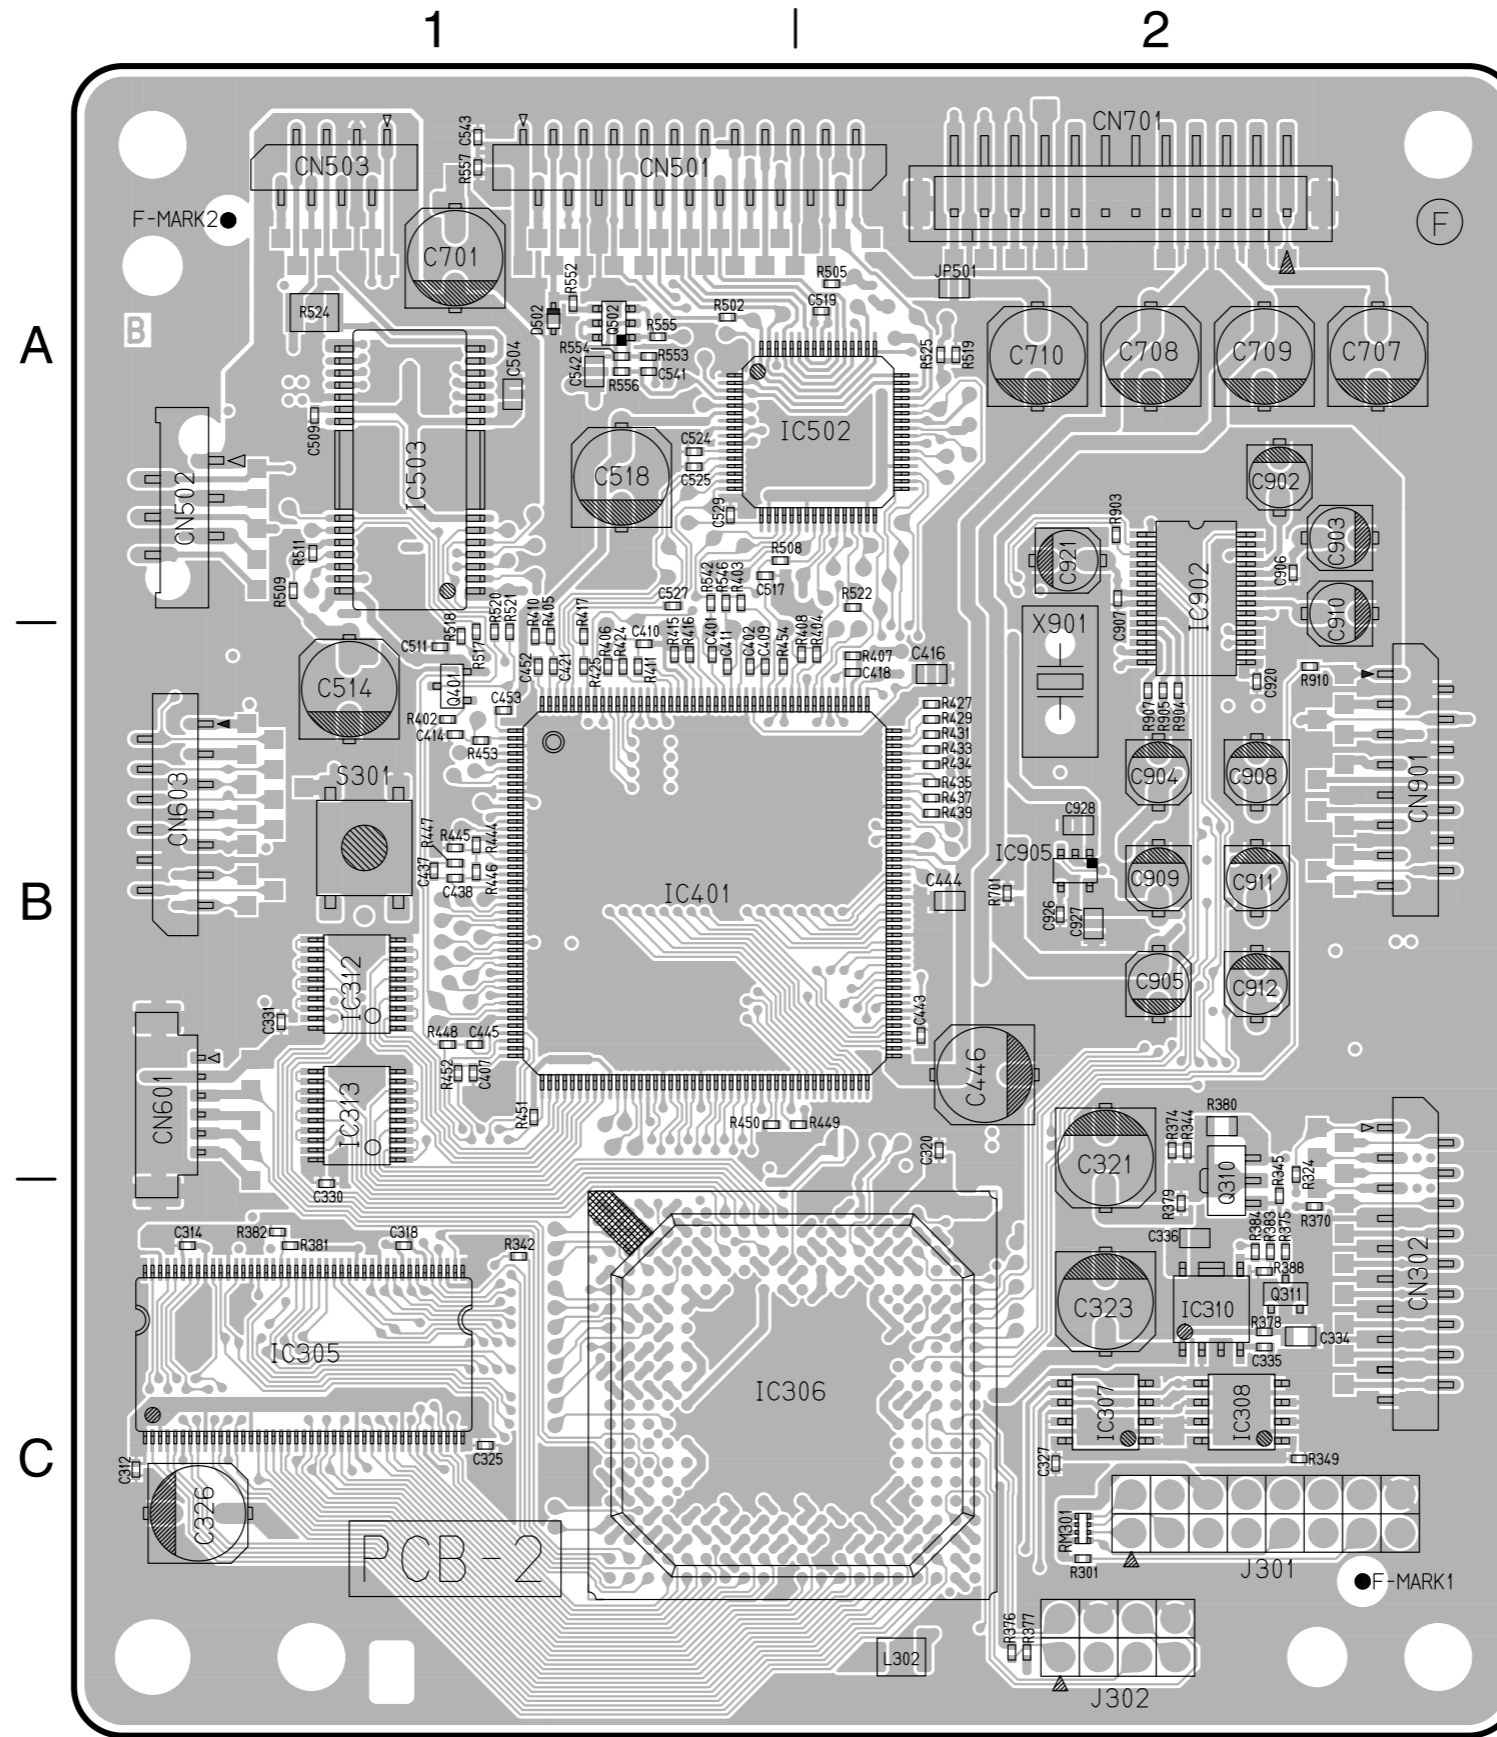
EU01 Main PC Board (Top pattern and Top parts location diagram)
